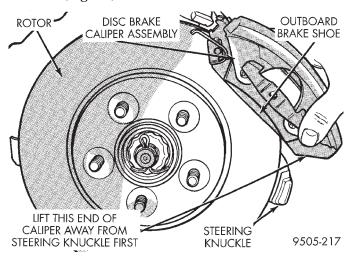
Disc Brake Caliper Removal/ Installation On Steering Knuckle
